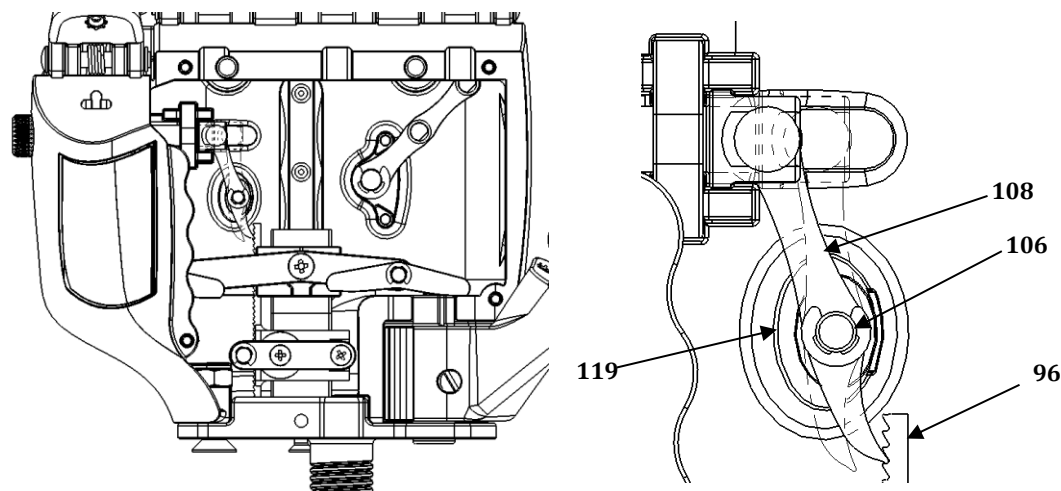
Palmar and close-up view of the pawl mechanism with engaged and disengaged positions shown. 116
